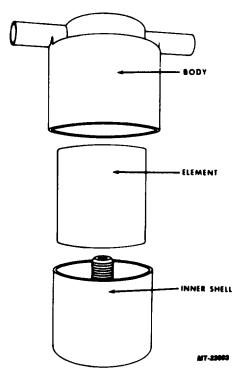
Exploded View of Replaceable Element Type Air Cleaner
